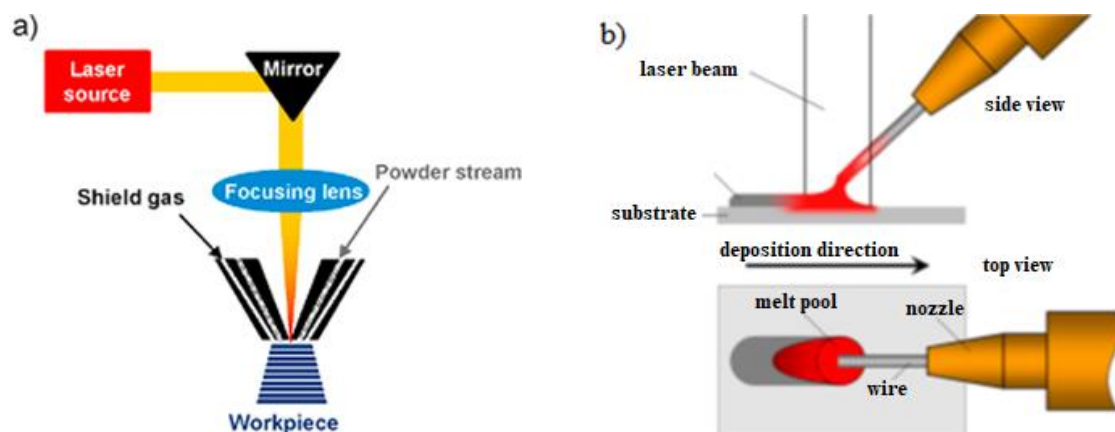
Schematic drawing of the DED process, a. powder-feed laser deposition, and b. Wire-feed laser deposition [51, 52]
